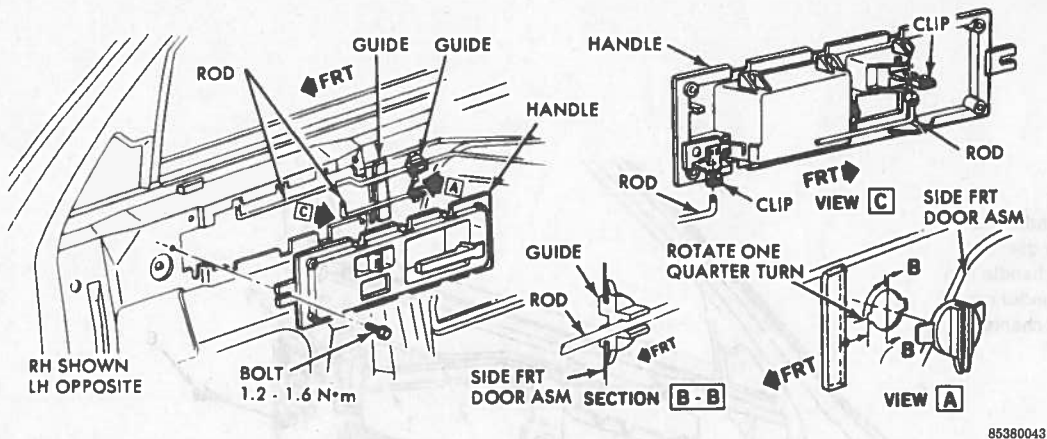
Exploded view of the early model inside door handle/lock assembly
